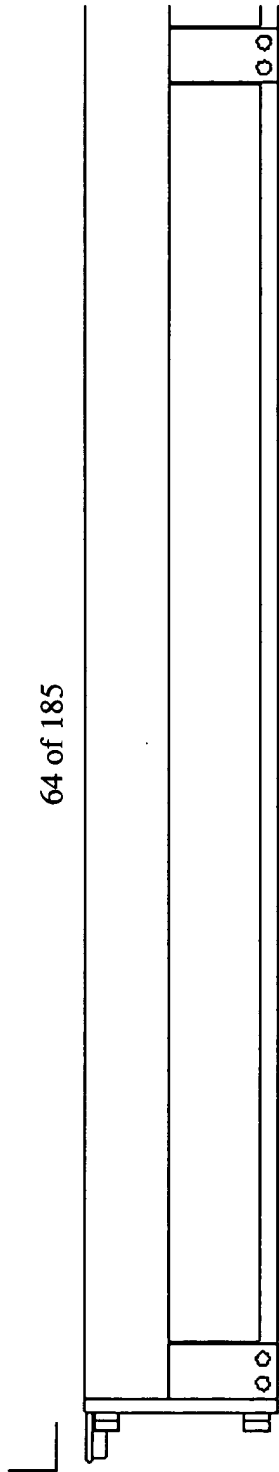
B: Front view of the right end of a ceiling frame (40 foot high cube collapsible cargo container)
